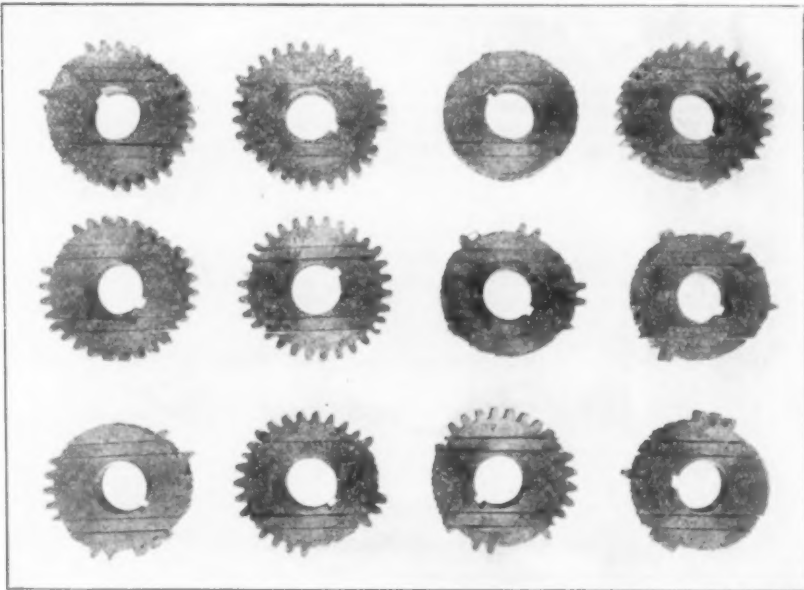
METHOD OF OBTAINING TEST SPECIMENS
